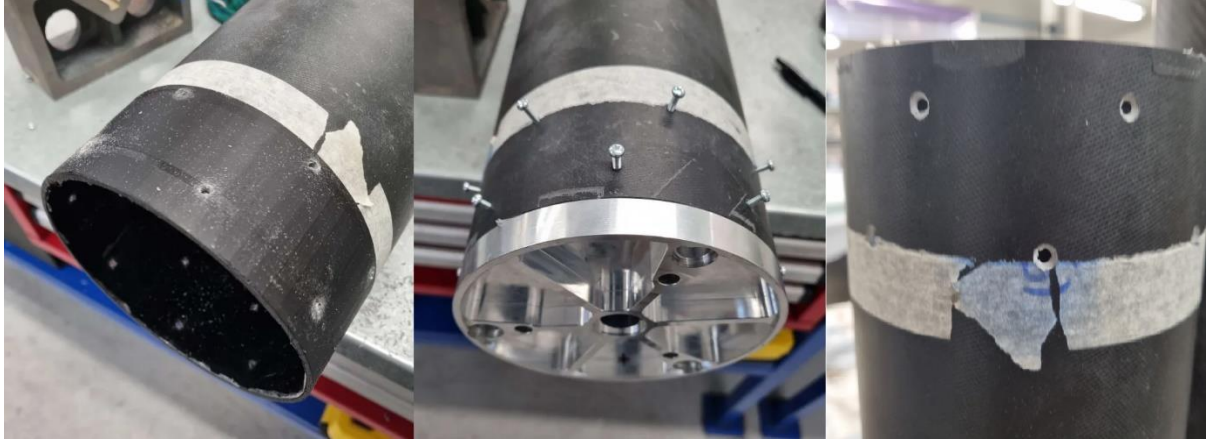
PAYLOAD JIG OVER THE TUBE, AIR BRAKE ASSEMBLY, AND COUNTERSUNK HOLES
